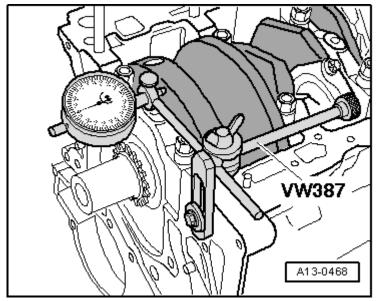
Identifying Dial Indicator Attached Together With VW387 Dial Gauge Holder To Cylinder Block
